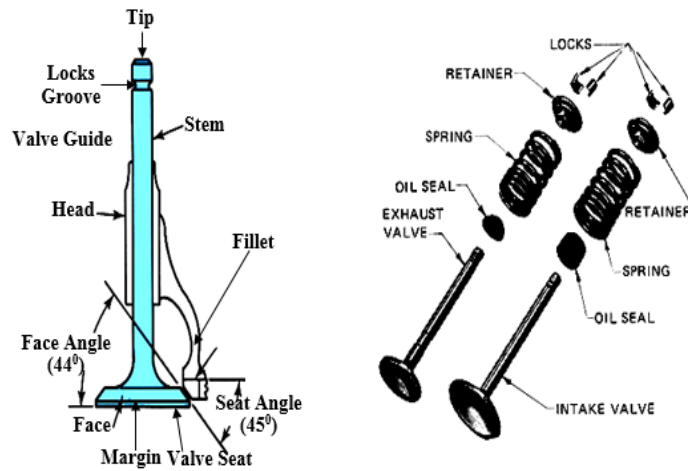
49 Construction and Assembly of a Poppet Valve [37]
